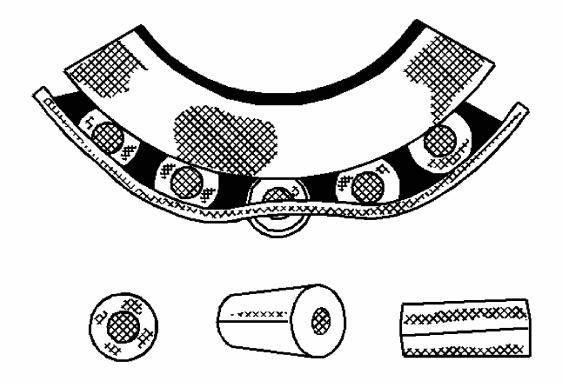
Identifying Bent Roller Cage Courtesy of GENERAL MOTORS CORP.
